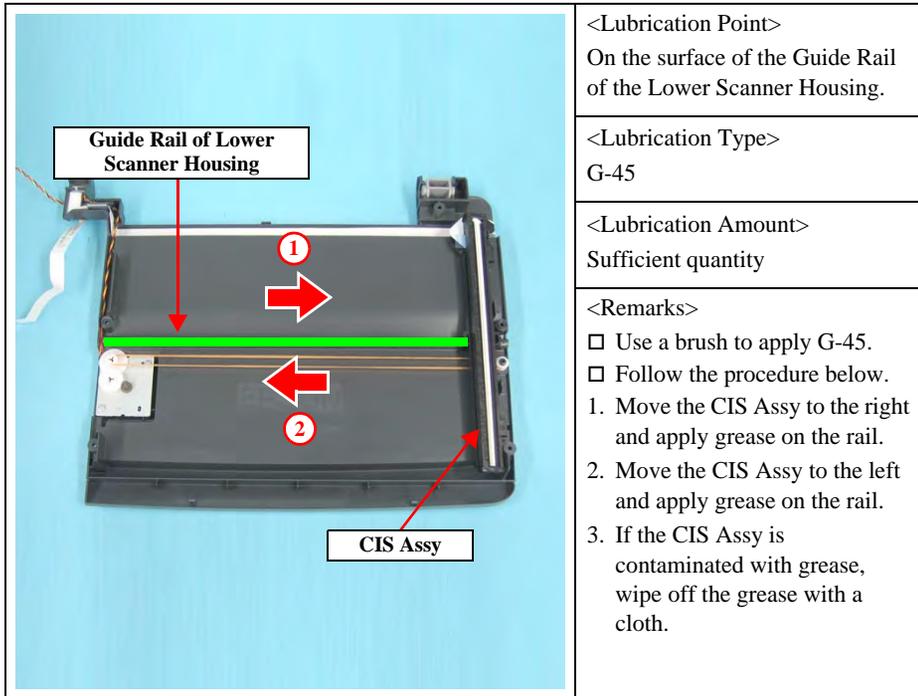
Lubrication on the Guide Rail of the Lower Scanner Housing
